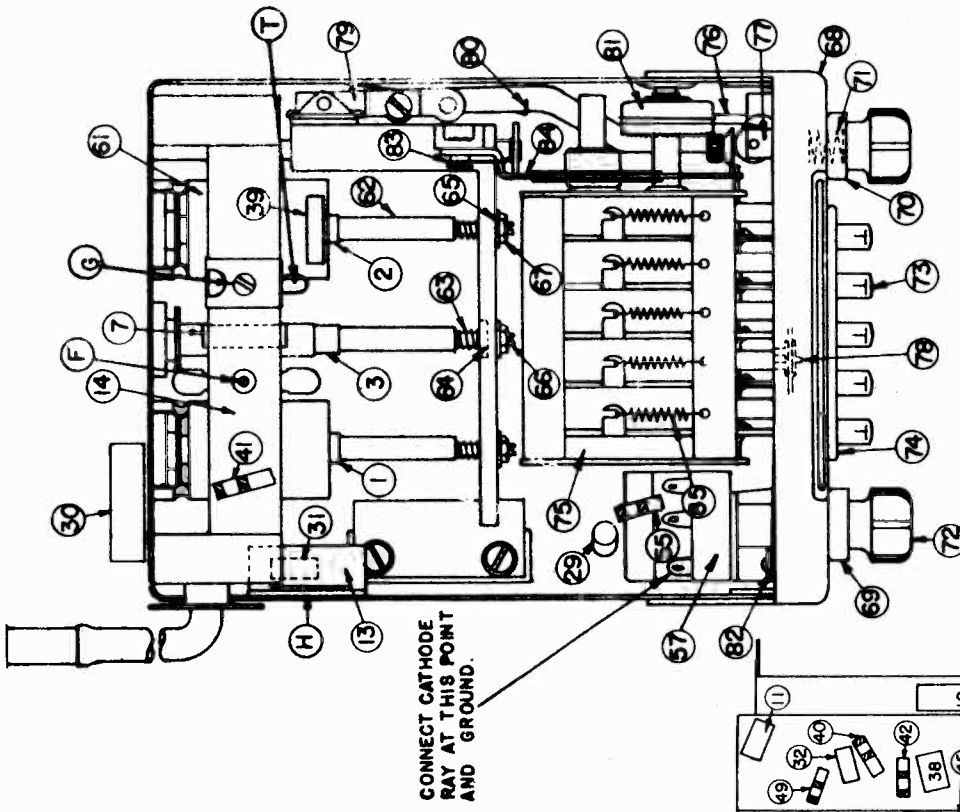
PARTS LAYOUT--TUNER ASSEMBLY
